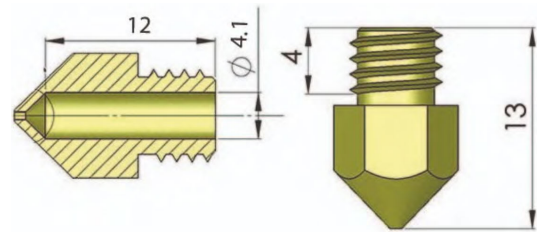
Diagram of the modified hot-end with a CNC machine (units in mm).
